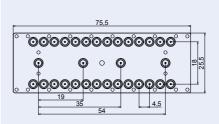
Schematic drawing of the Mini Luer platform Fluidic 1633
